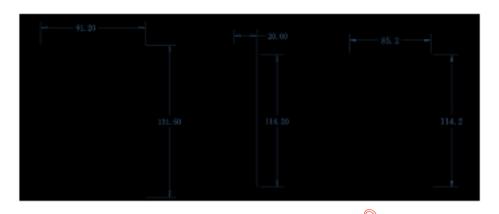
Keypad pallet dimension and mounting hole
